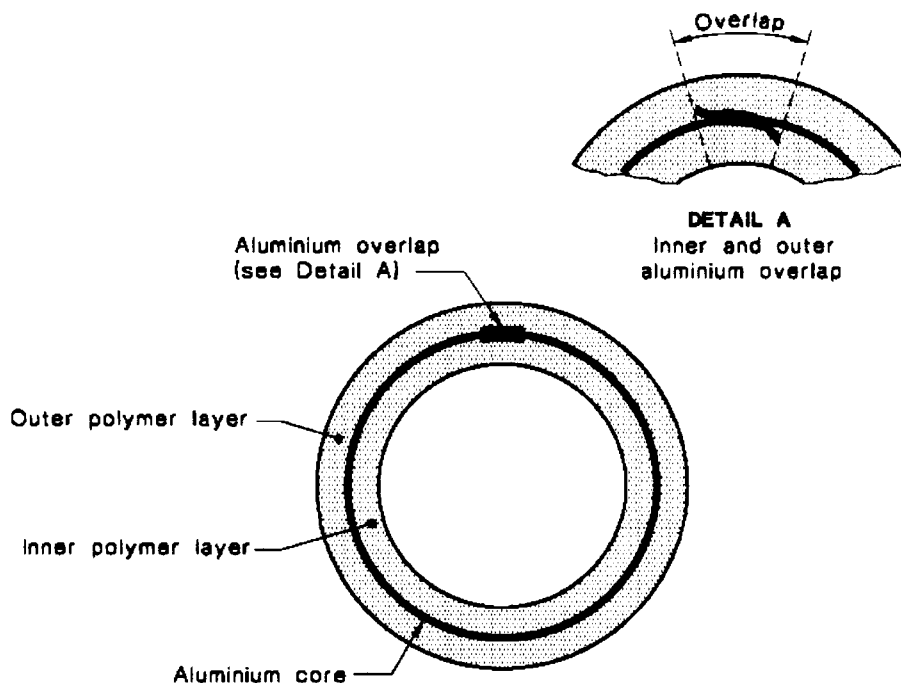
CROSS-SECTION OF PIPE STRUCTURE
